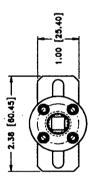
PBPM KINEMATIC MOUNT CONE ASSEMBLY
